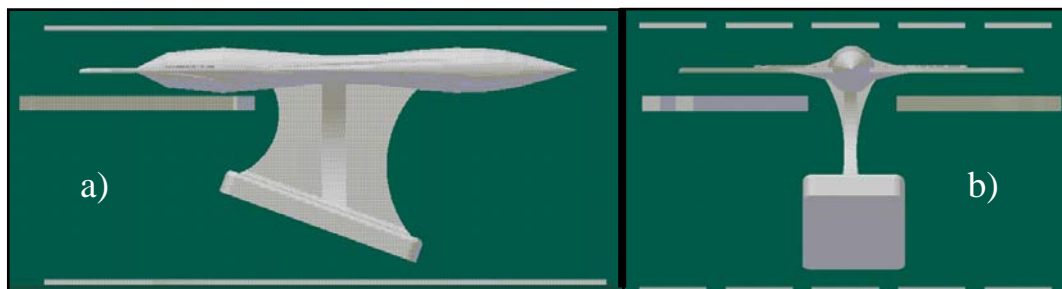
Aircraft sacrificial part layout (a) side view and (b) front view
